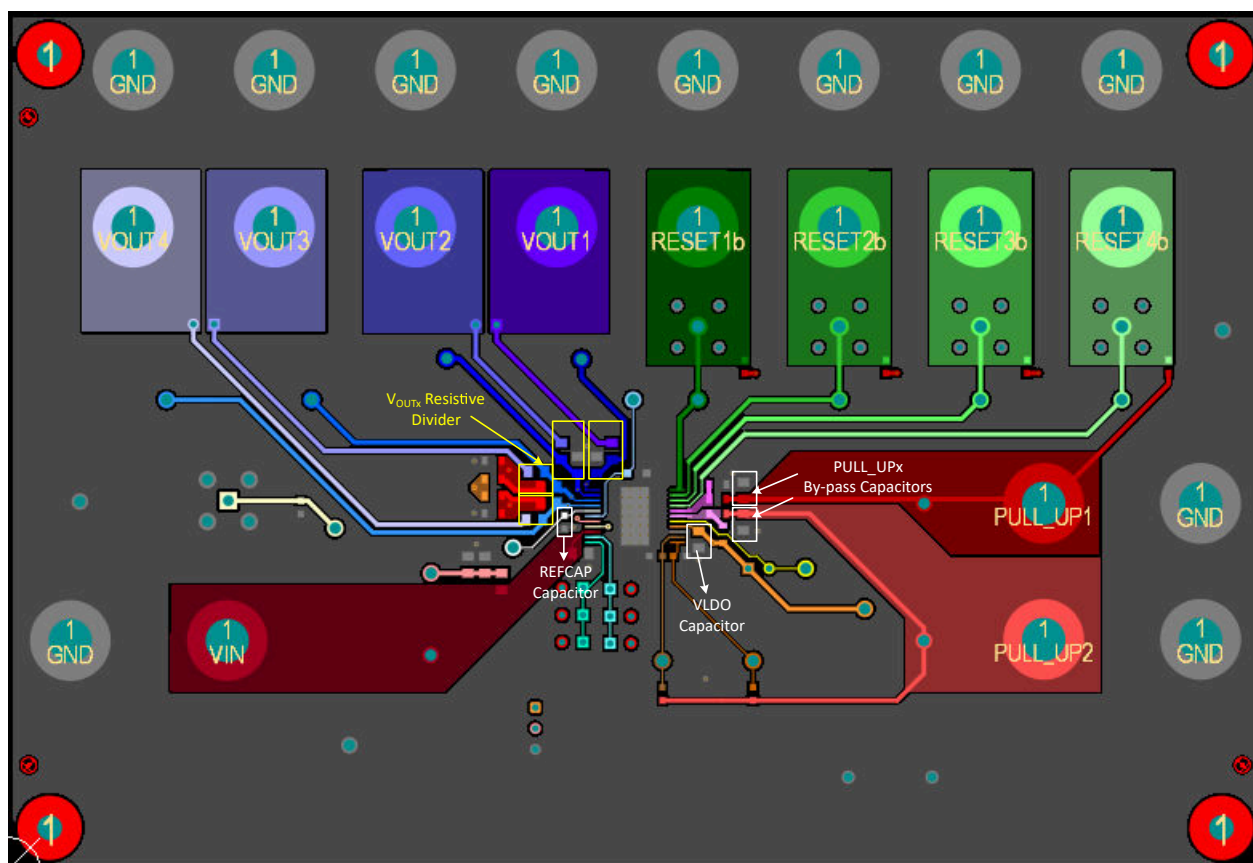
Printed Circuit Board Layout Example: Top Layer
